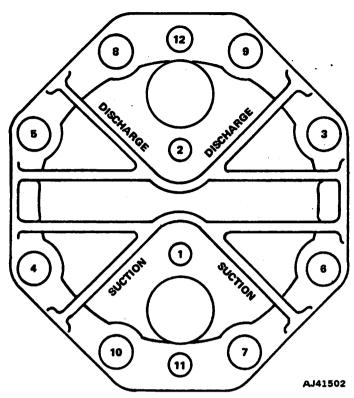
E-33 Compressor Head Capscrew Tightening Sequence
